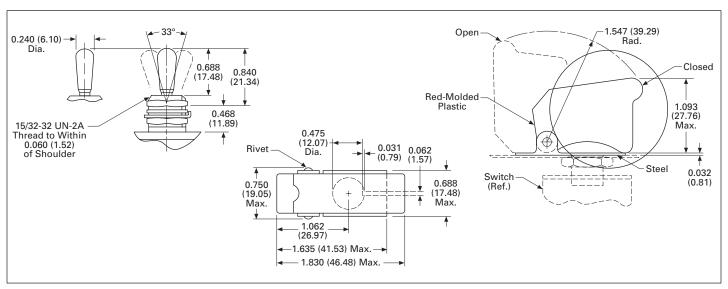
Switch Guard-Approximate Dimensions in Inches (mm)
